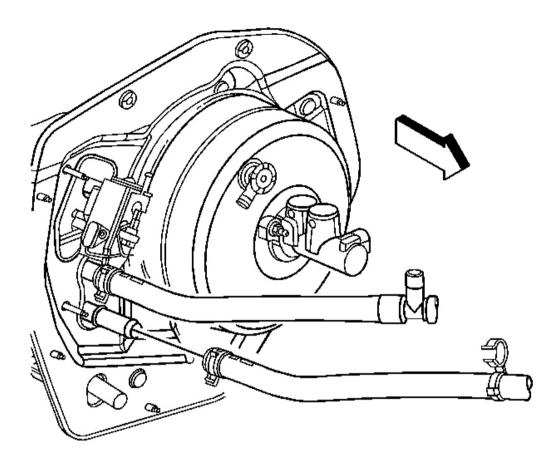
Heater Inlet, Hose Clamp & Heater Core Courtesy of GENERAL MOTORS CORP.
